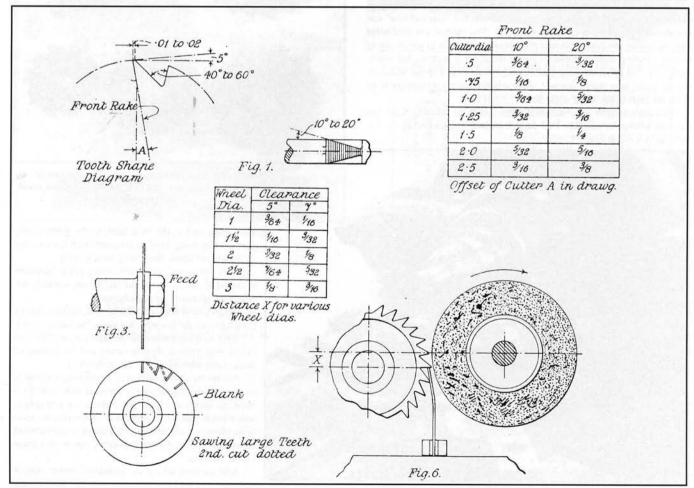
and the table given will make the setting clear, the wheel revolving against the cutter, which must be held down on the stop, prevents that small "grinding burr" forming.
